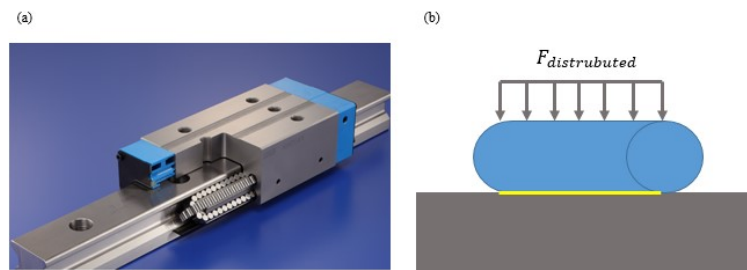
(a) Sectional view of a roller type linear guide [38] (b) Hertezian Linear Contact
